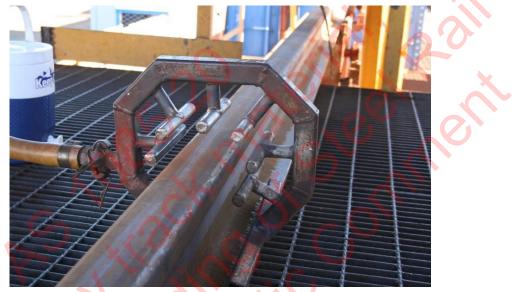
Air-quench rig used in conjunction with fixed flashbutt welding equipment (full head coverage)
